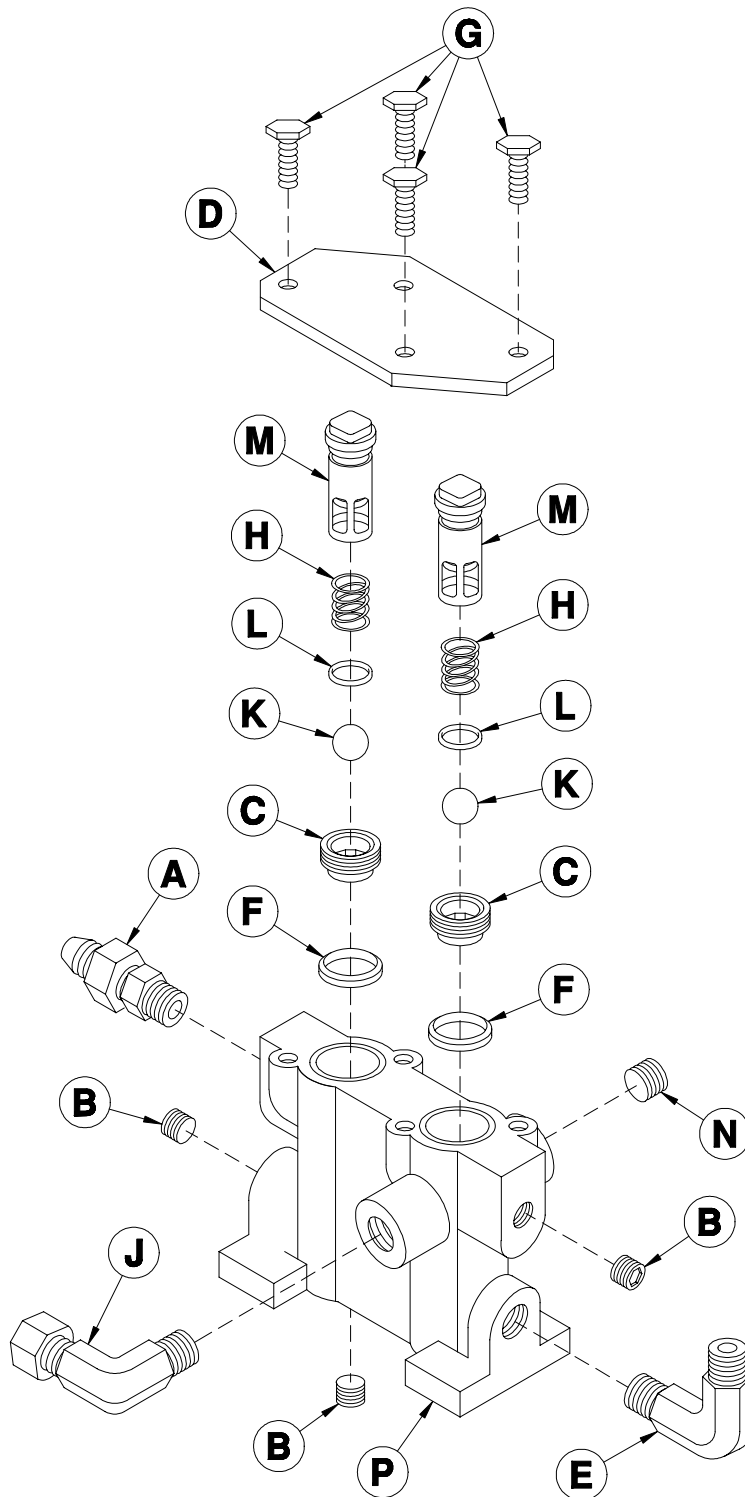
Pump Base Assembly (Part No. 15428 and 15478), Exploded View
